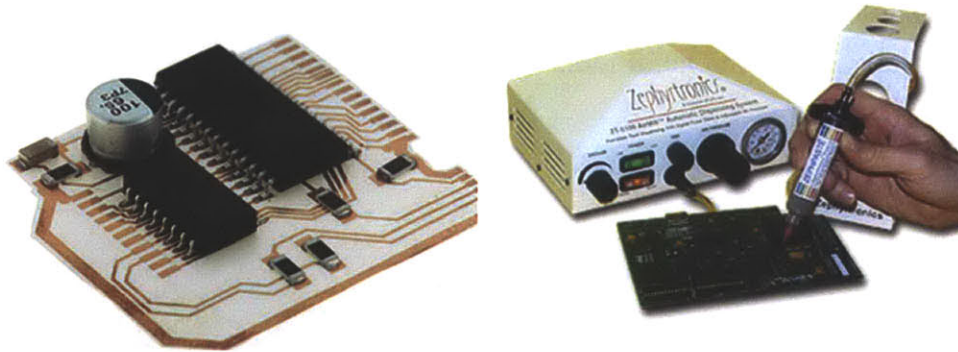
Component attachment with low-temperature solder paste and a solder paste dispenser.
